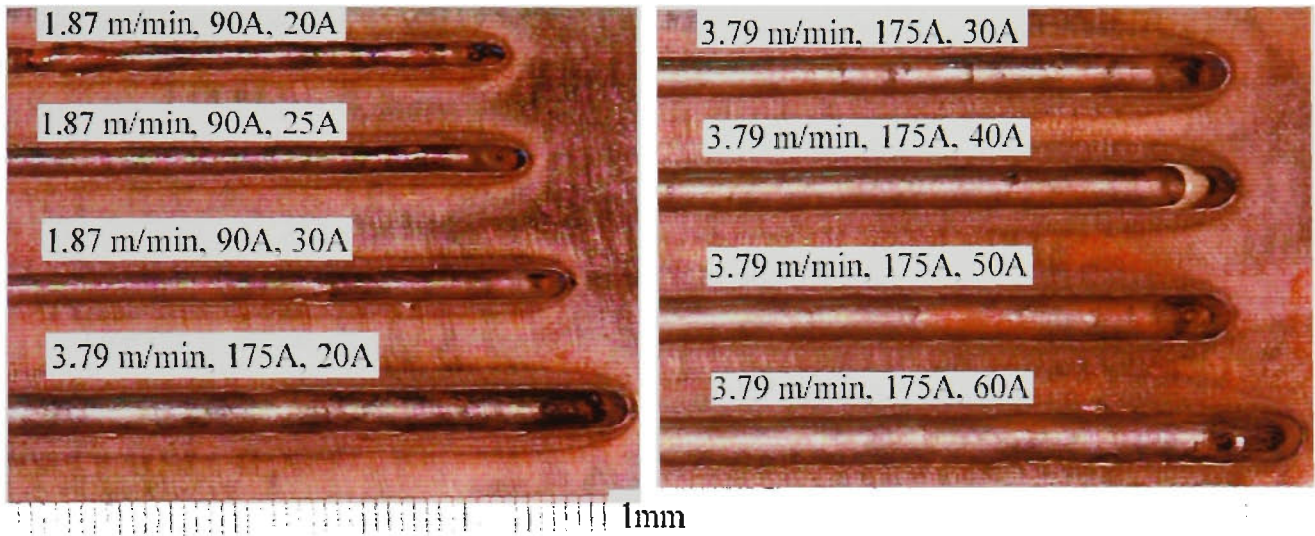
Photograph of weld beads for reduced wire feed speeds
